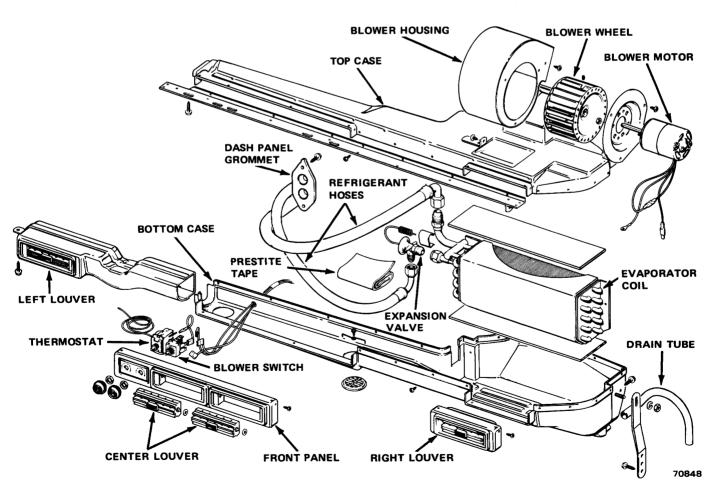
Evaporator Disassembly—Cherokee-Wagoneer-Truck
